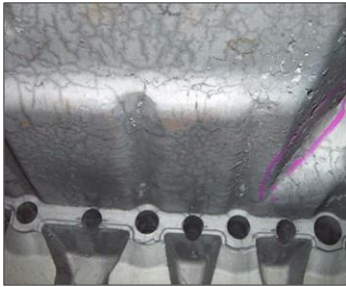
Heat checking test result: The appearance of test specimens after 10,000 shots.
